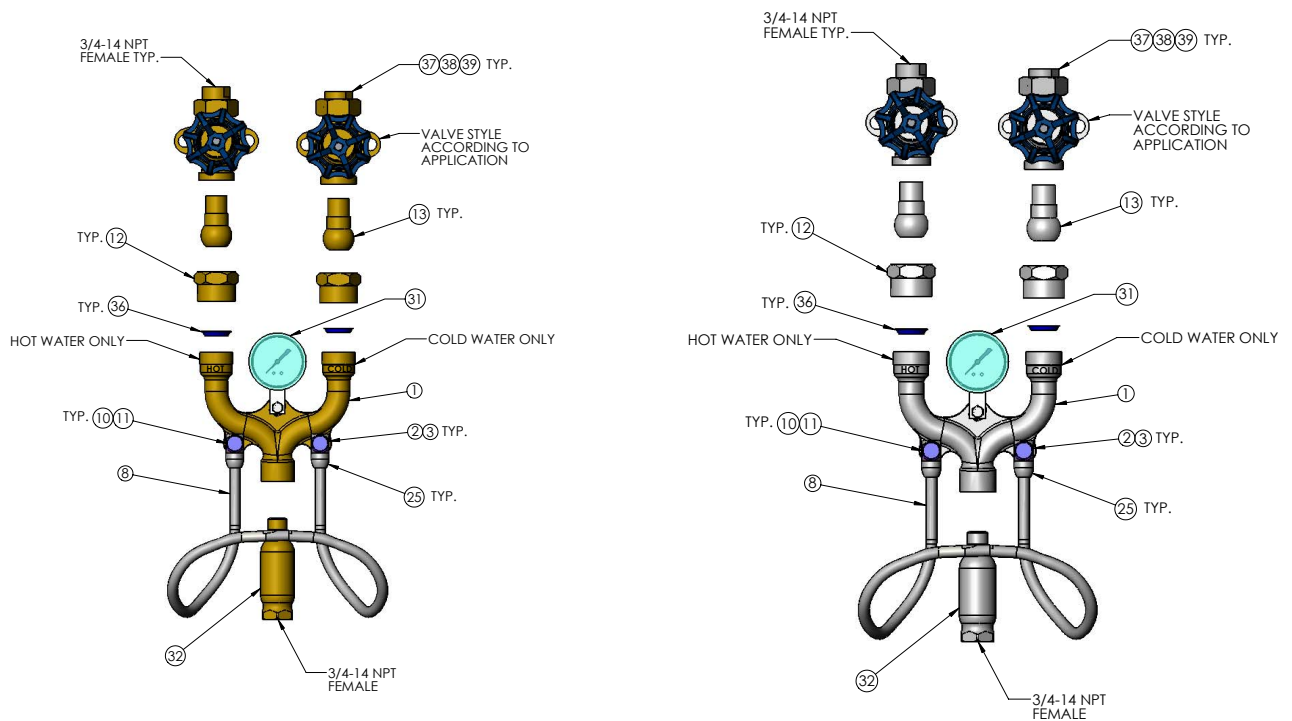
A & 2B: Exploded view of the Globe Valve entry in both Bronze & Stainless Steel
